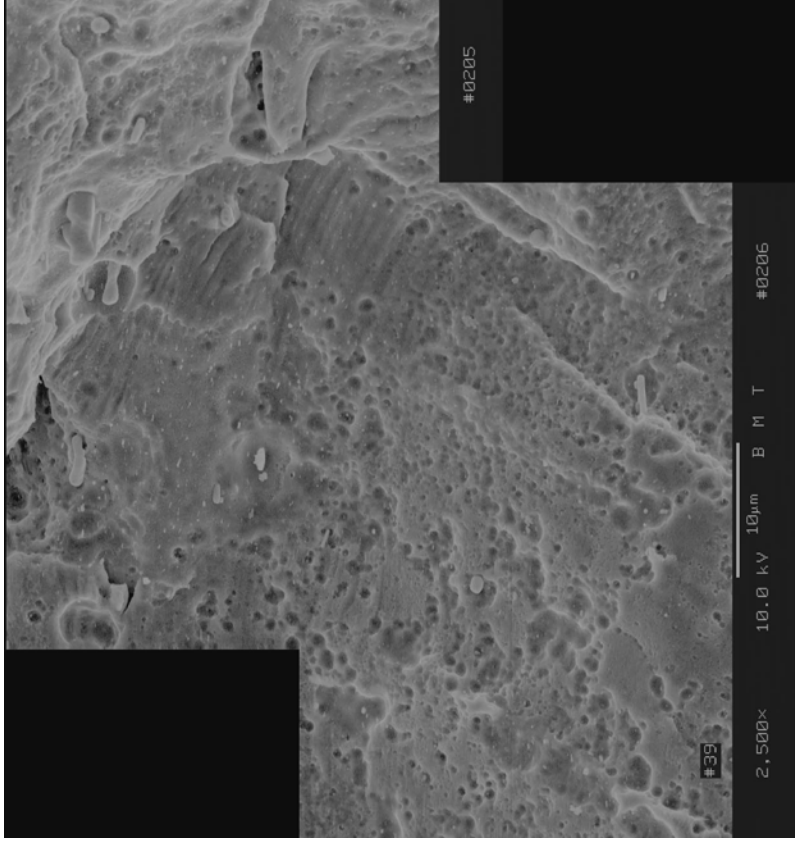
, scanning electron microscope photographs showing fatigue striations near the end of the flat profile fracture surface aft of Hole 39. Just beyond these regions, the fracture surface was dominated by a dimpled morphology, indicative of the fracture mechanism of micro-void coalescence, or ductile separation. Severe pitting due to corrosion can also be seen.
